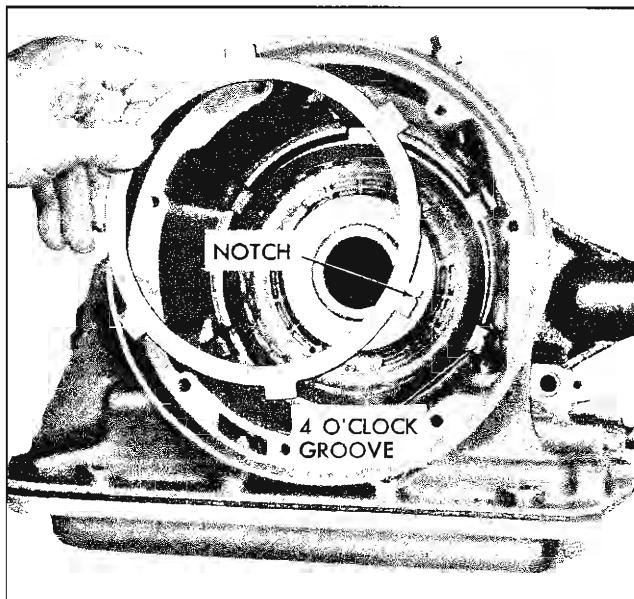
A-58 Installing Reverse Clutch Reaction Plates
